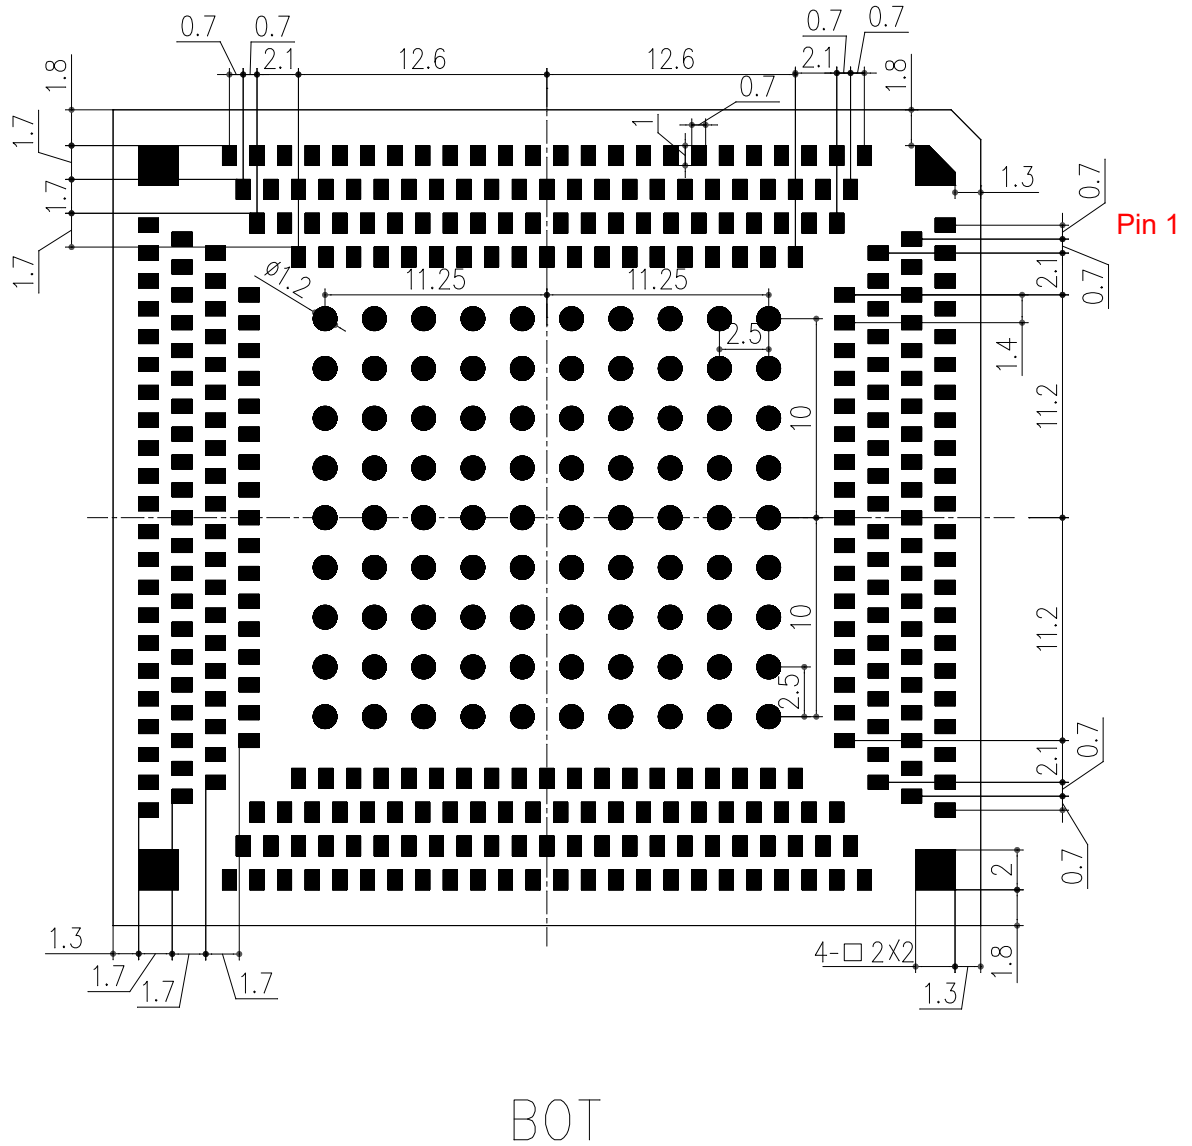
Module Bottom Dimensions (Bottom View, Unit: mm)
